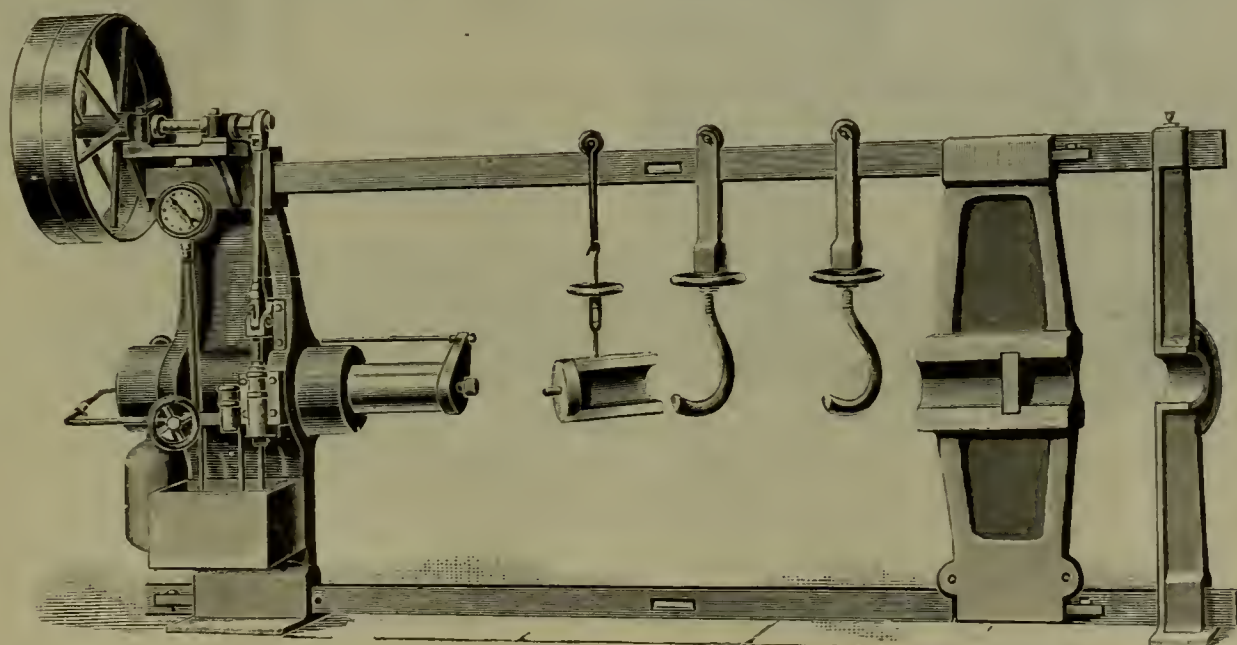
HYDRAULIC CAR WHEEL PRESS.
